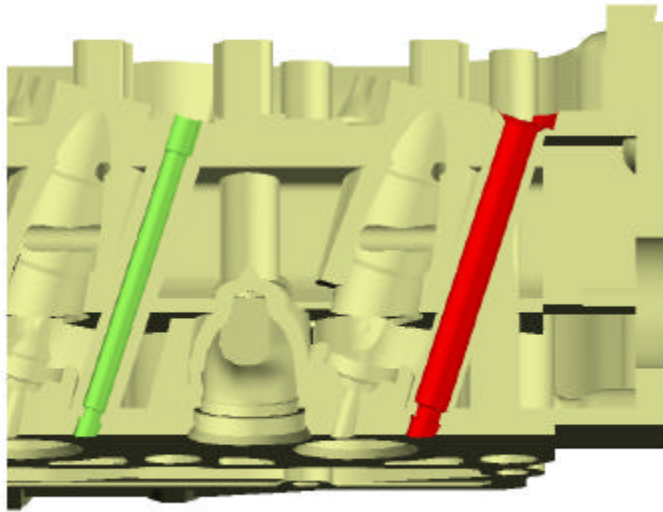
Sectional view of the glow plug and the air-gap spark plug holes
